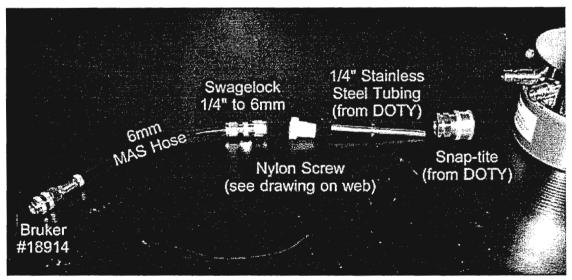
Exploded view of the Bruker to DOTY MAS conversion. The Bruker quick connect (#18914) directly attaches to the existing MAS bearing and drive lines.
